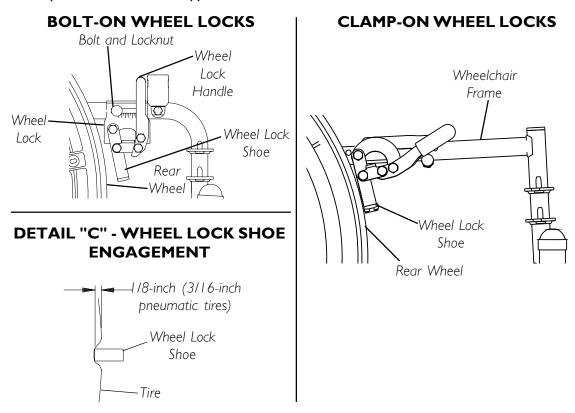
ADJUSTING THE WHEEL LOCKS
